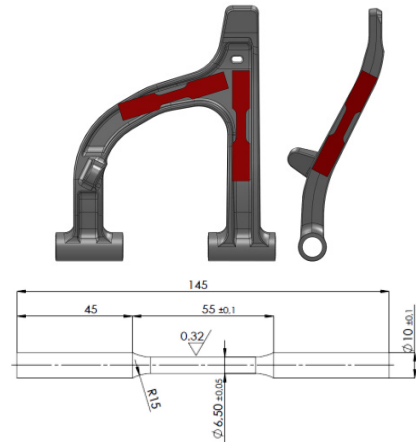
Model of control arm - note marking of places where samples were taken for testing; the drawing below shows the shape and dimensions of the specimen used in testing of mechanical properties
